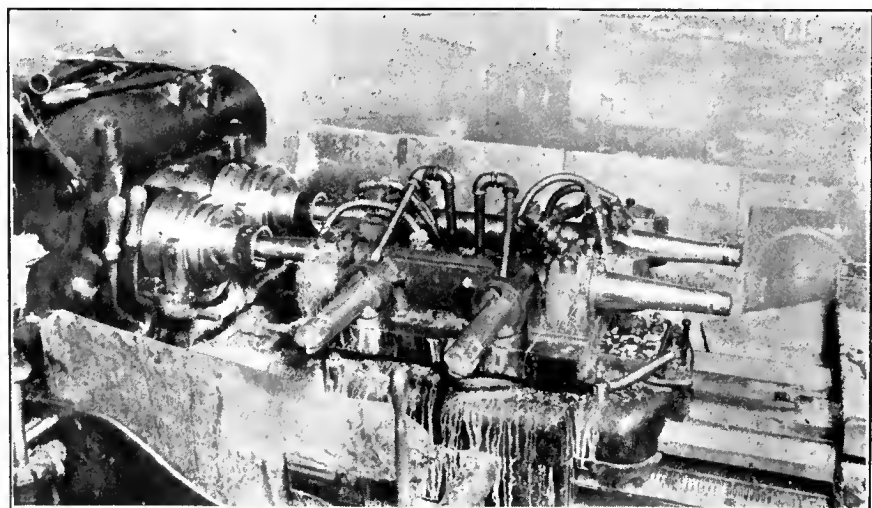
BORING EQUIPMENT ON DOUBLE SPINDLE J. AND L. FLAT TURRET LATHE.
